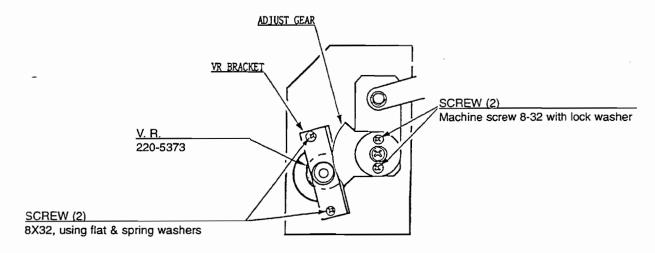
ACCELERATOR AND BRAKE ASSEMBLY
